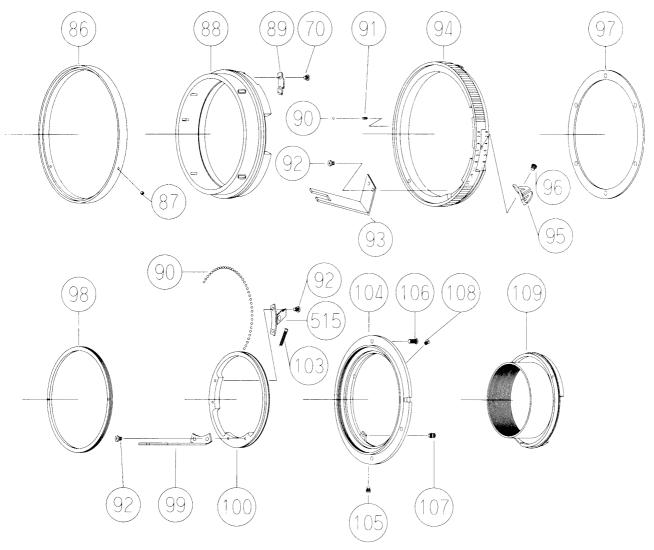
Nikon Mount Assembly (Ref. 507)
